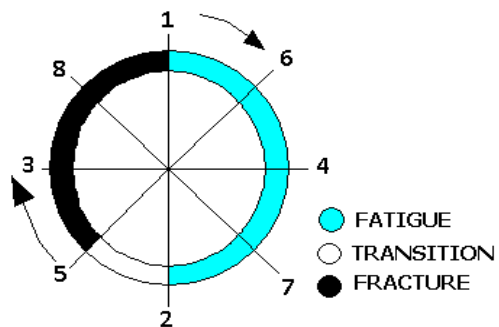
presents an overview of the mapping of the fractured surface of the pulley, while Figure 6 the two broken parts of the pulley rearranged for a better visualization. Figure 7 just ahead shows only one of the shorter pulley failed piece also for a better comprehension.
